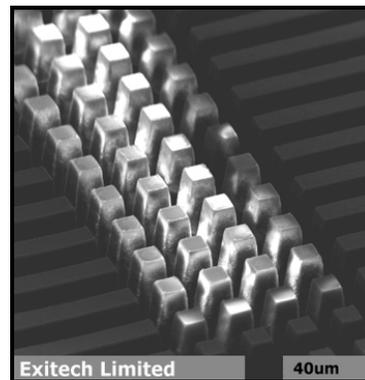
Micro-optical structures produced by excimer laser mask projection and workpiece motion technique.
